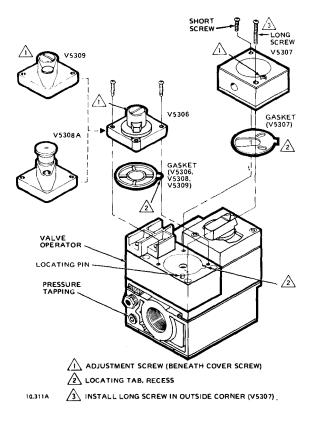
Servo pressure regulator installation on combination gas control equipped with valve operator.
